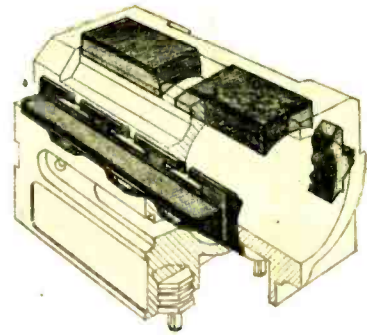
Magnetic pole pieces, shown dark, cast into a frame.
